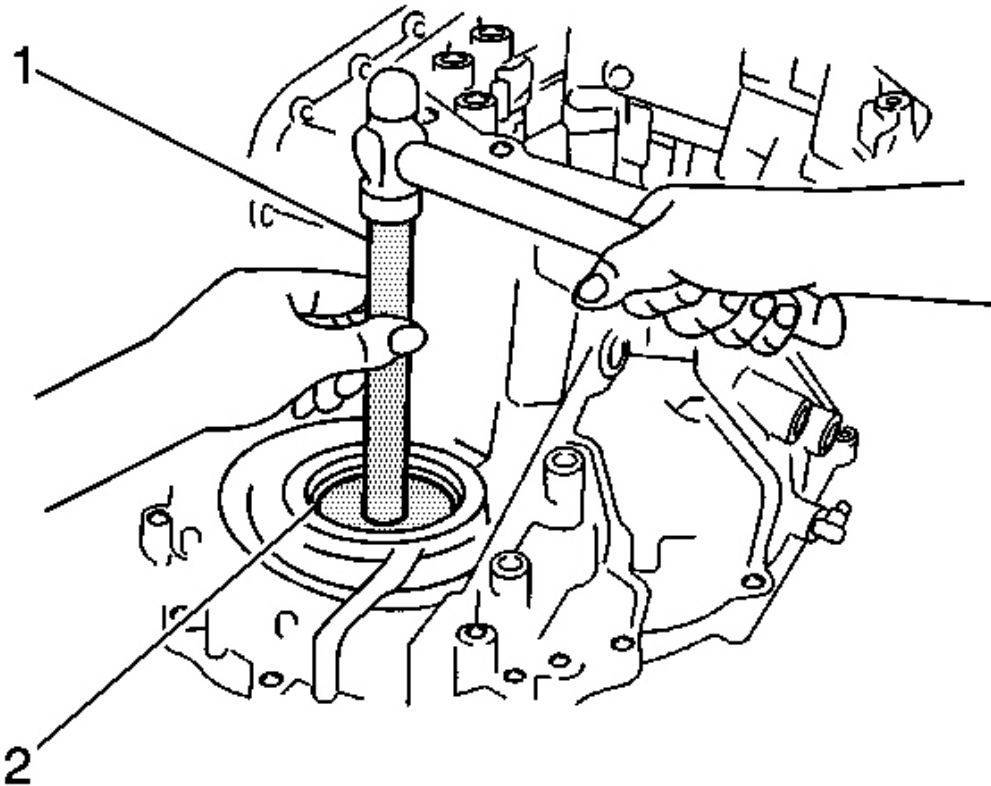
Removing Transaxle Case Side Bearing Outer Race & Shim Using DT 46463 & DT 46465
